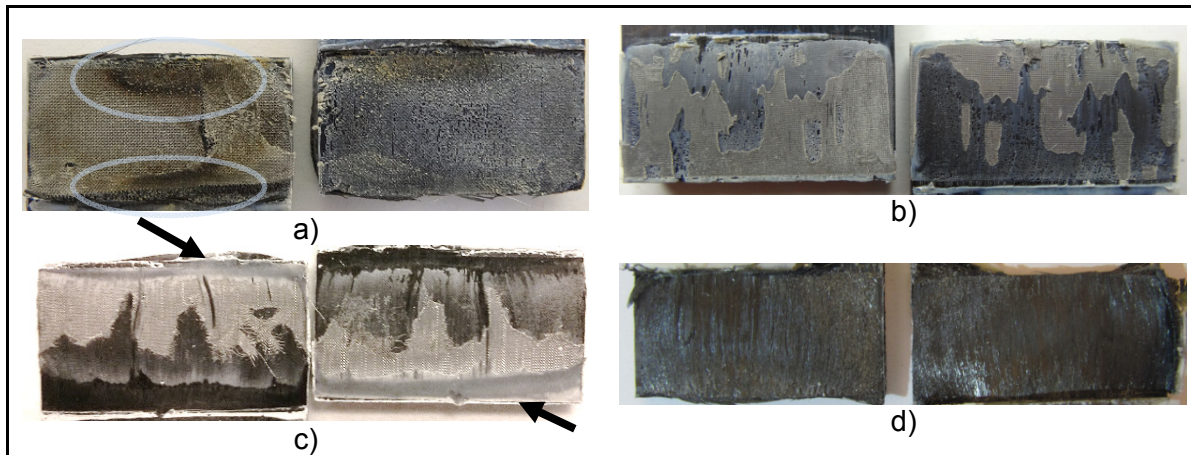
Fracture surfaces: a) specimens welded by IW with a current of 550 A and HE A, b) specimens welded by IW with a current of 500 A and HE D, c) specimens welded by RW and d) specimen welded by UW. Arrows indicate unwelded area.
